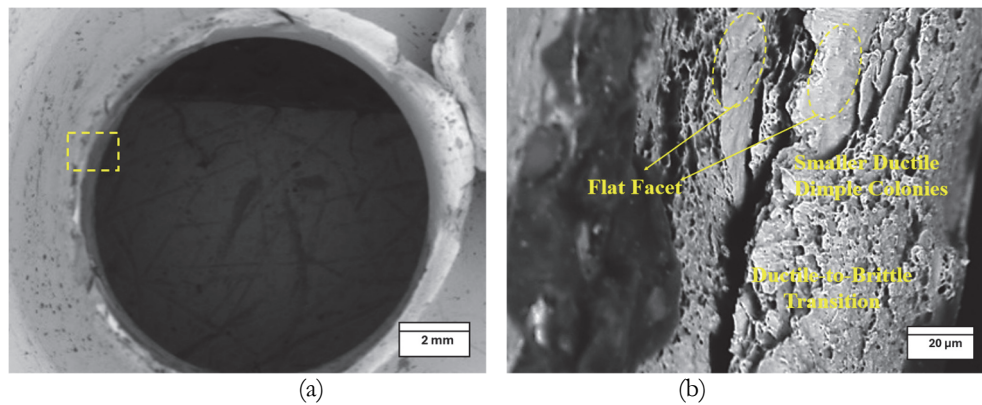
Fractographic examination of the fracture surface of 12% pre-strained specimen.
